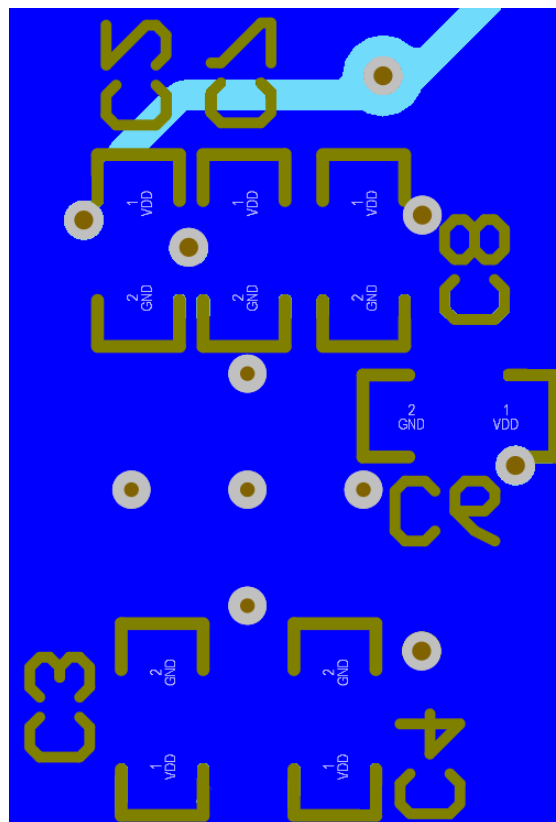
PCB Layout Example for CDCDB400, Bottom Layer
